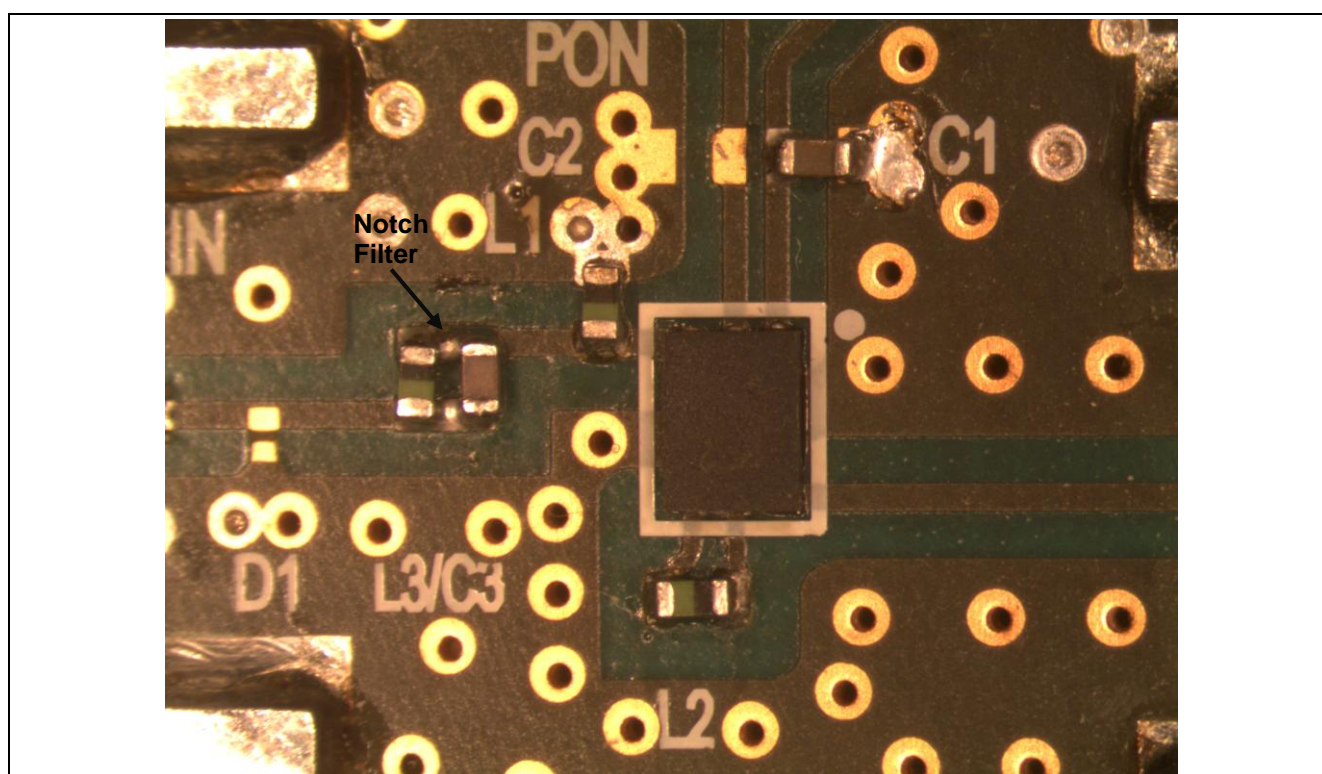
Picture of Evaluation Board (detailed view) M110416 V3.0
